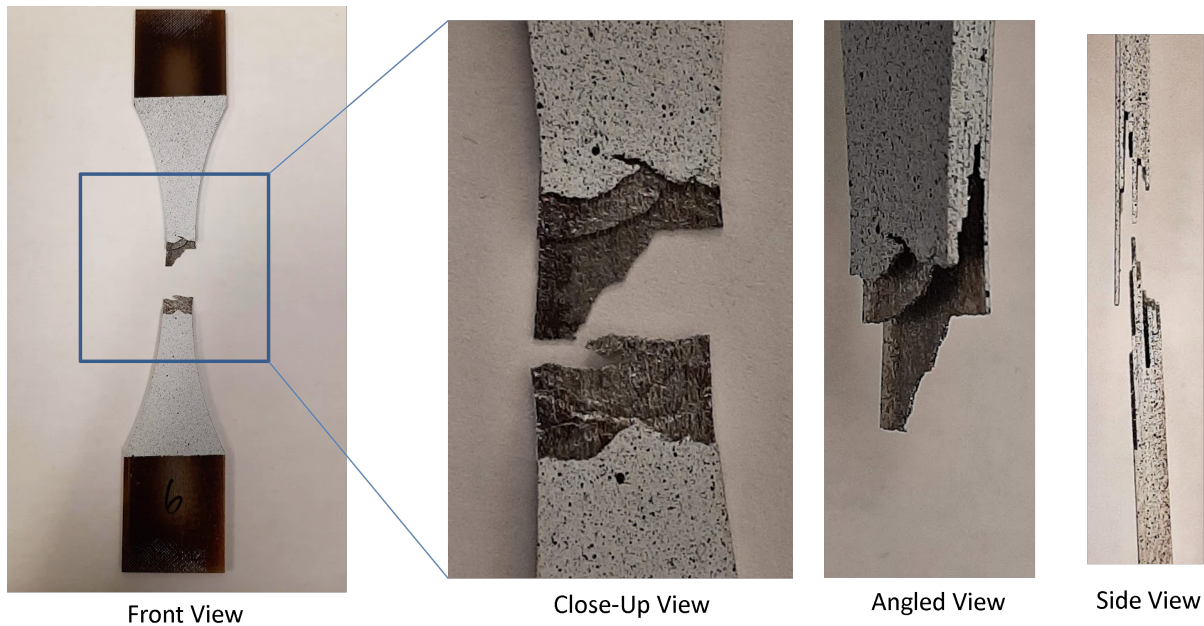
Fractured quasi-static laminated sample grain structure (a) front view (b) close-up to fracture surface (c) angled view (d) side view
